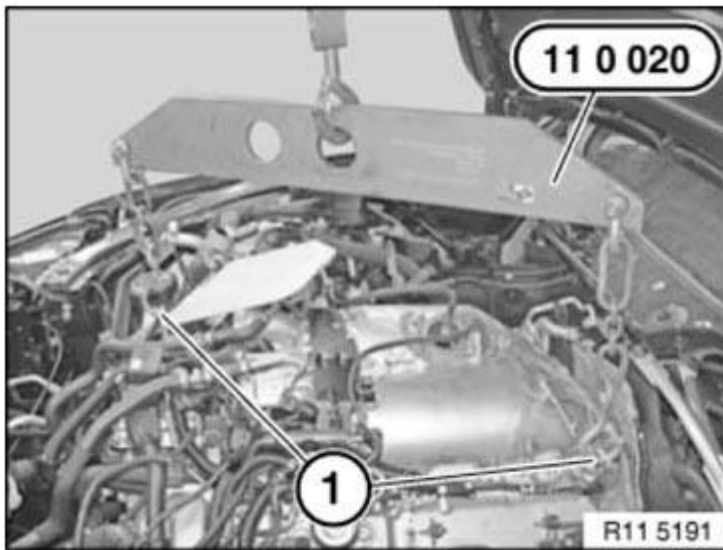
Lifting Out Engine With Special Tool (11 0 020)
